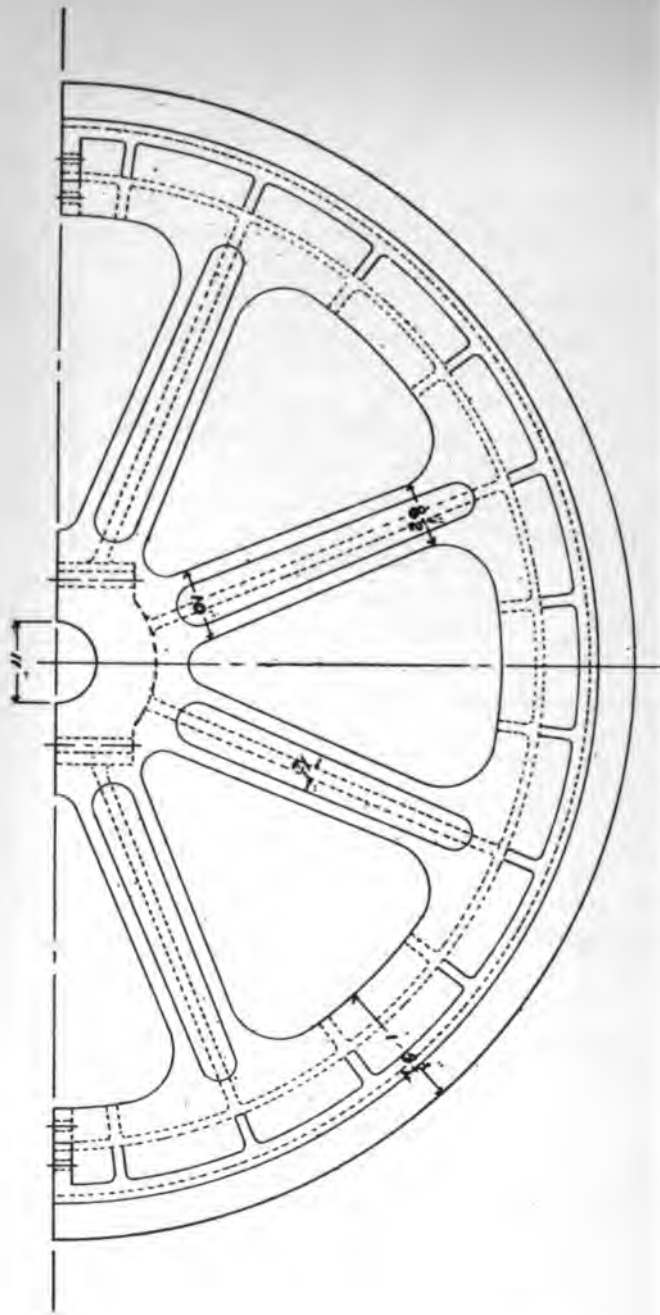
A.—DETAILS SHOWING THE BRAKE RING CAST ON THE DRUM, FIGS. 358 AND 359.
